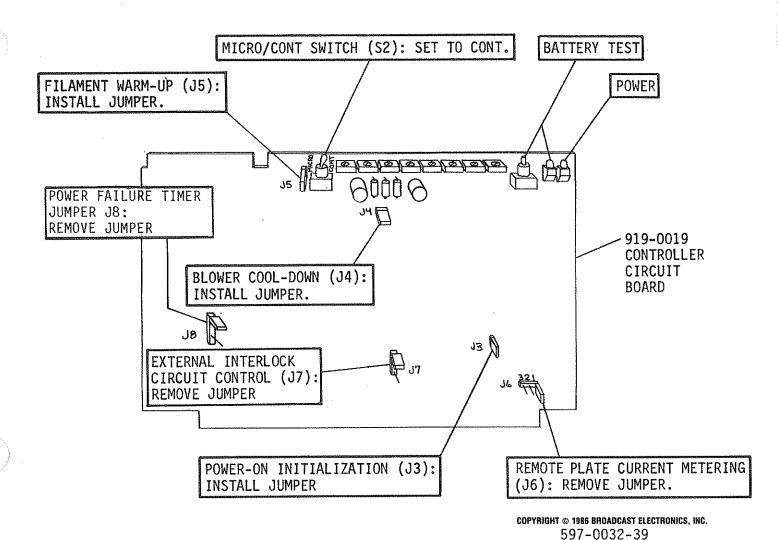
CONTROLLER CIRCUIT BOARD JUMPER-PLUG PROGRAMMING
